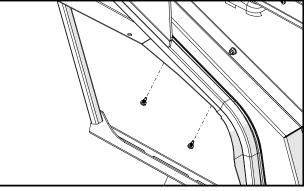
(re-install lower (2) Screws - Drive only)
